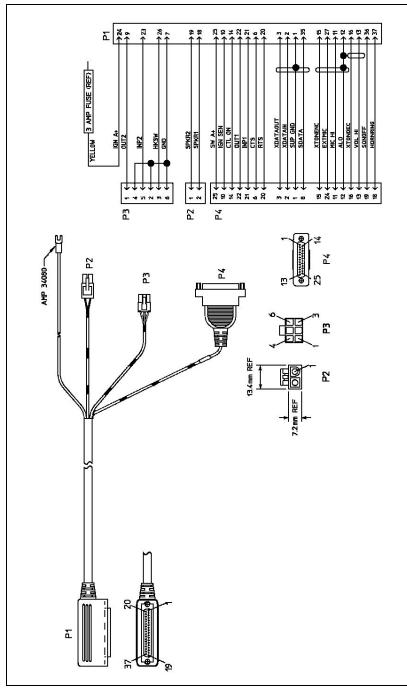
USA Front Mount Extended Option Accessory Cable 19B802554P2
